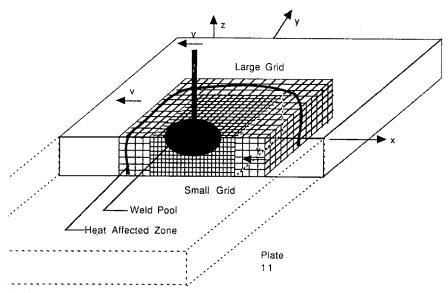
Geometrical arrangement of the numerical simulation for fusion welding process.
